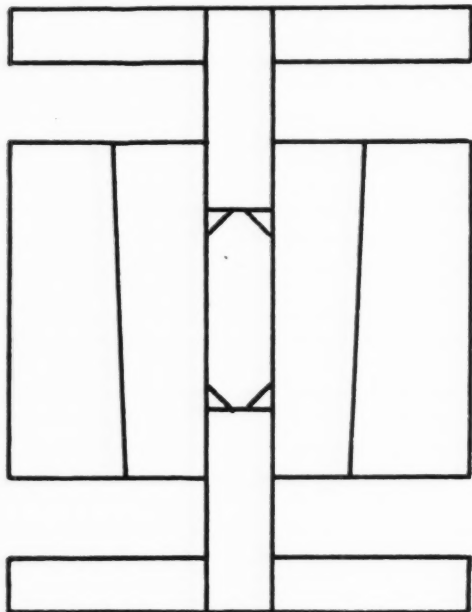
The piezometer, consisting of a core of carboloy forced into a conical steel sleeve.
